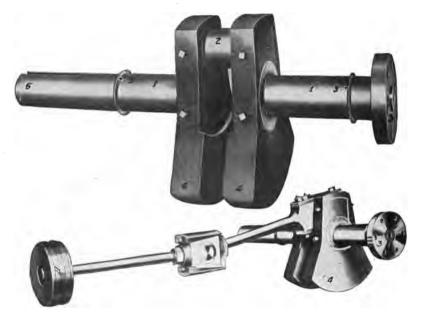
Connection of Piston, Crosshead, Connecting Rod, and Crank Shaft
